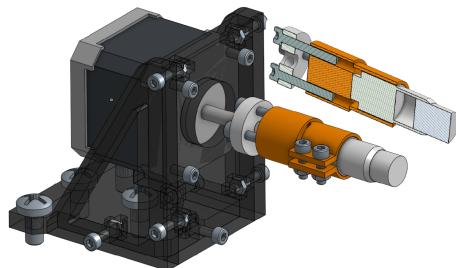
Z Driving Motor and Sliding Shaft Coupler
